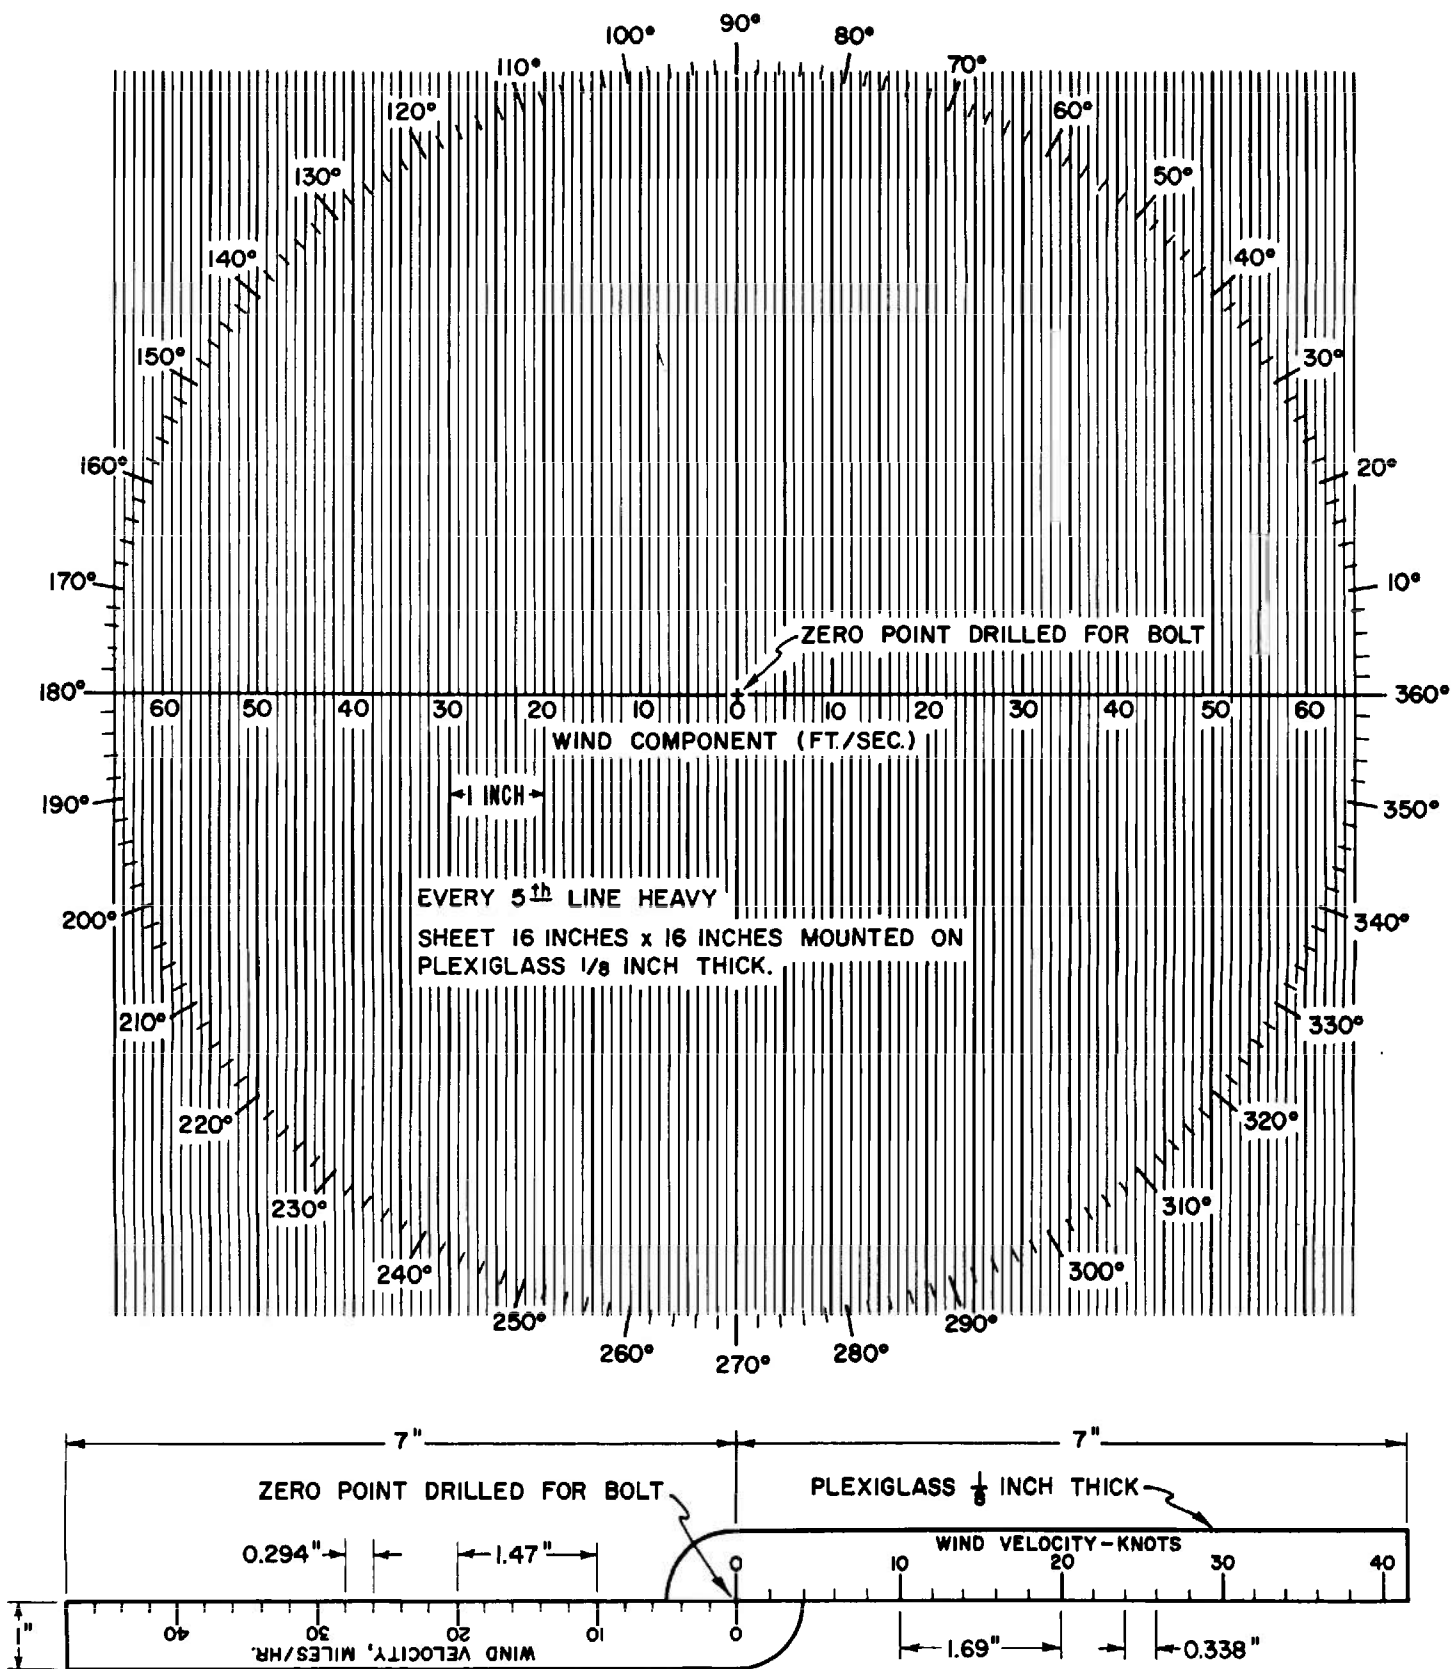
ELEMENTS AND DIMENSIONS FOR WIND BOARD
